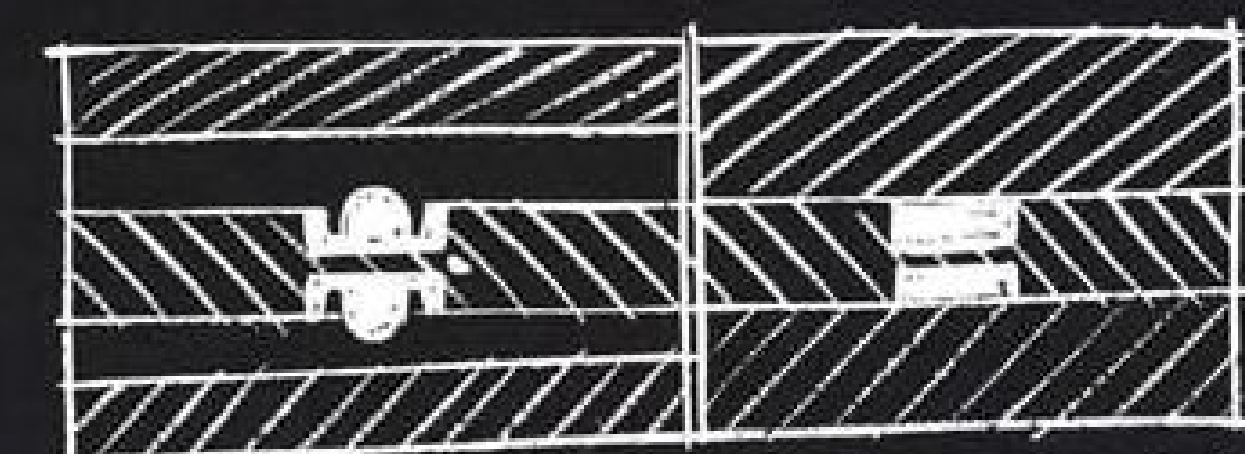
and 3 diagram the centerless grinding method used to finish Bower raceways. Use of this technique assures not only optimum roller guidance and maximum bearing life, but also virtually eliminates bearing runout. BEARING SYMMETRY WHICH RESULTS FROM THIS TECHNIQUE PERMITS ACCURATE SHAFT LO-
